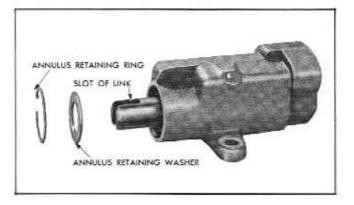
Exploded View—Annulus Retaining Ring and Washer
